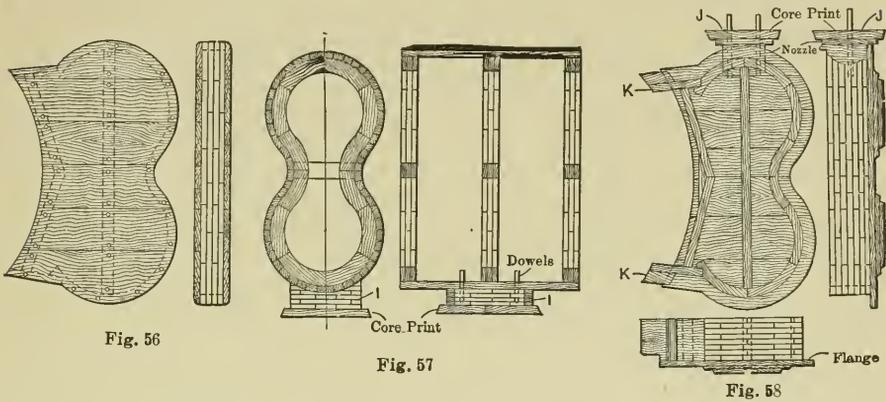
Plan of Steam Port Section of Steam Chest Fig. 57. Exhaust Chamber Section of Steam Chest
